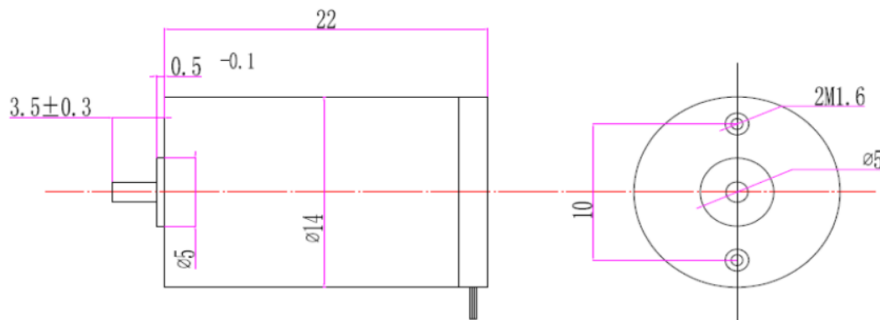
Dimensions of the chosen BLDC motor. [6]
